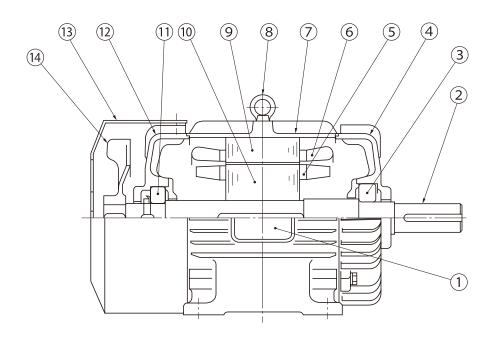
Construction of totally enclosed fan cooled squirrel-cage motor
